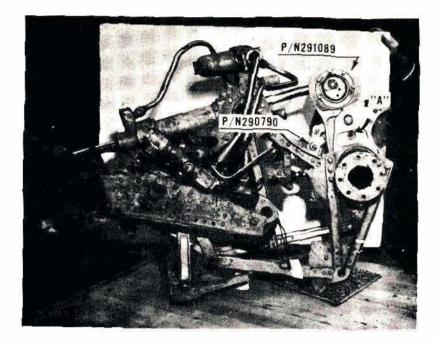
Elevator boost package. Bushing where bolt should have been is indicated by arrow "A".
